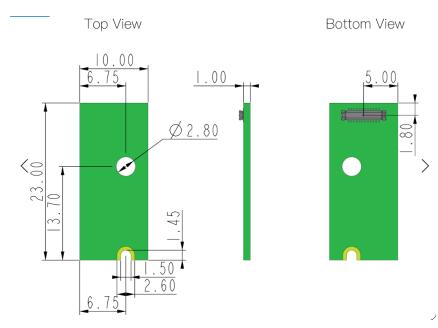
shows the dimensions and the mechanic drawing of the RAK1910 module.
